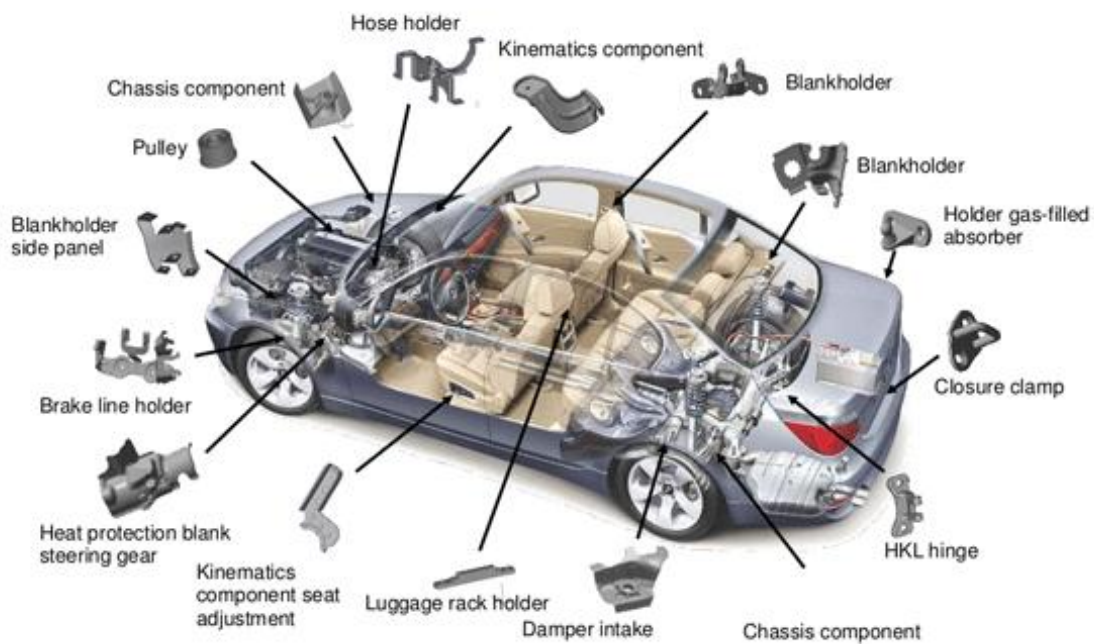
Automotive parts applied AM technology (*Image source: metal-am.com*)
